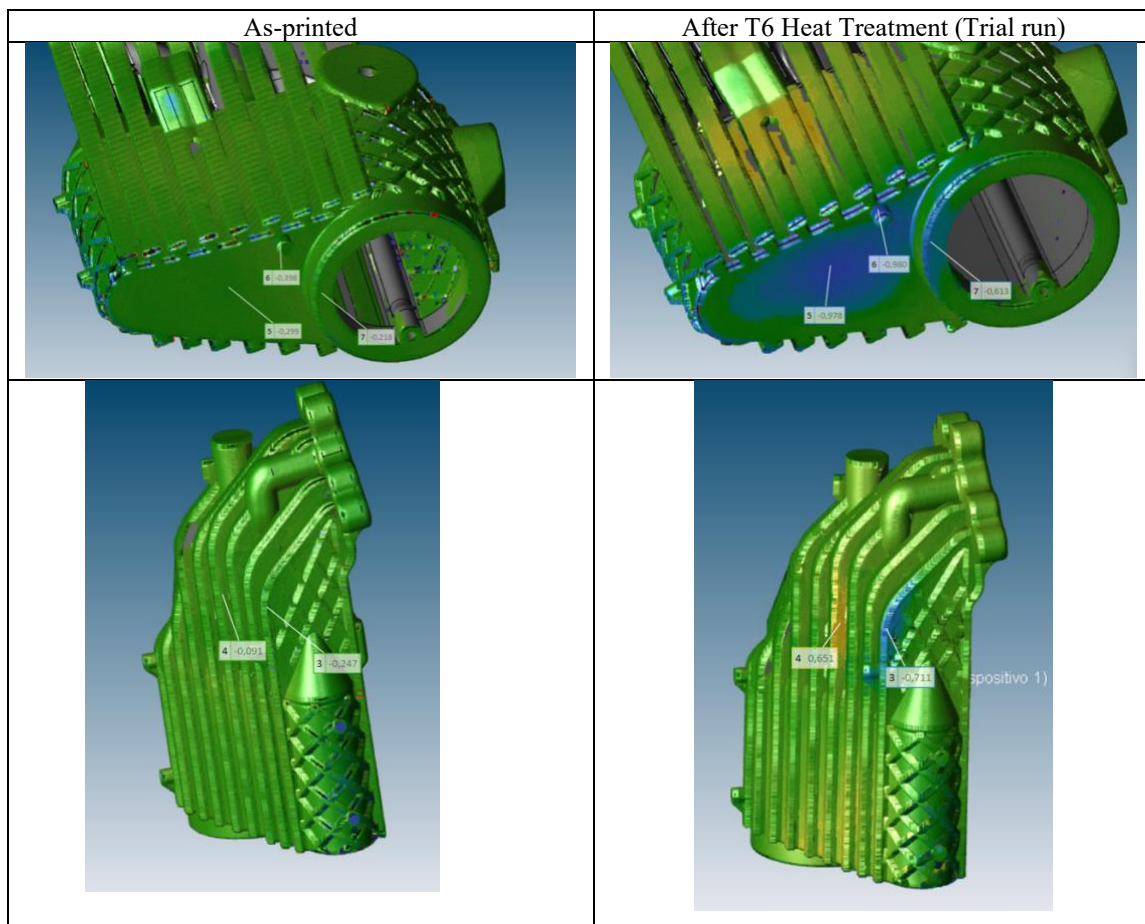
3D Scan of the Auxiliary tank before and after the trial T6 Heat Treatment run, where some shape deformation beyond acceptable tolerances were recorded. As corrective action, custom jigs were manufactured in order to contain the part during the heat treatment
